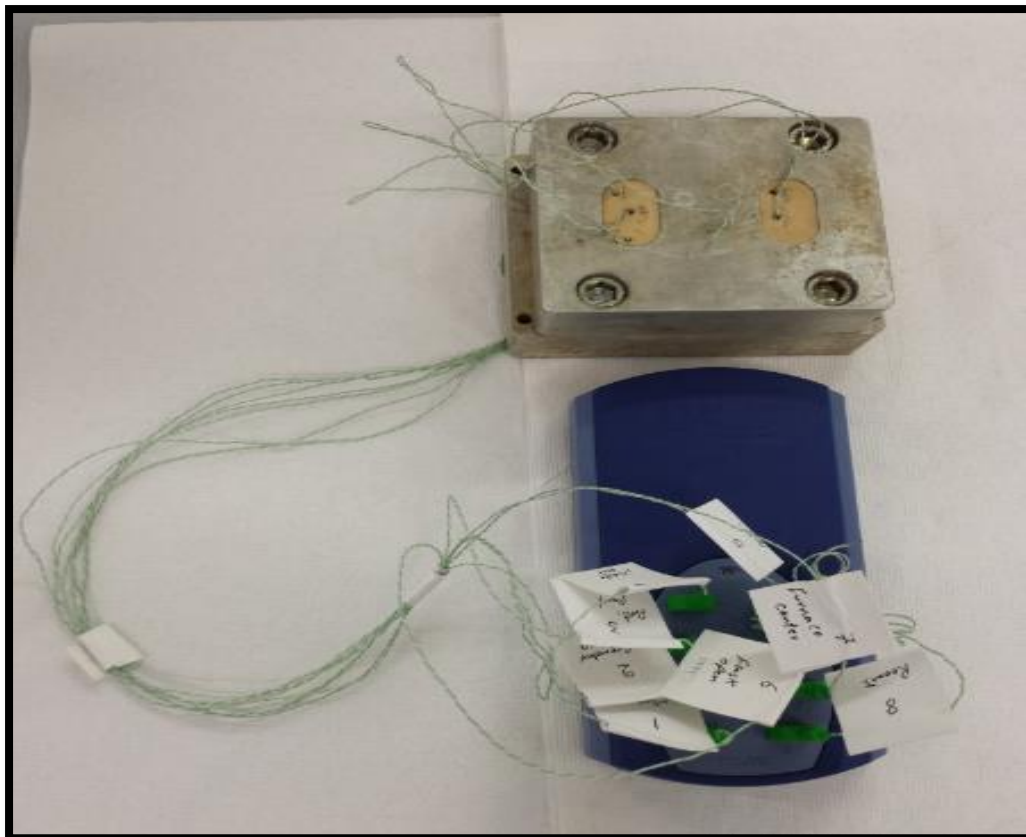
Multi-channel digital thermometer with multi-thermocouples of sensitive sensors inserted inside the mould cavity at different locations
